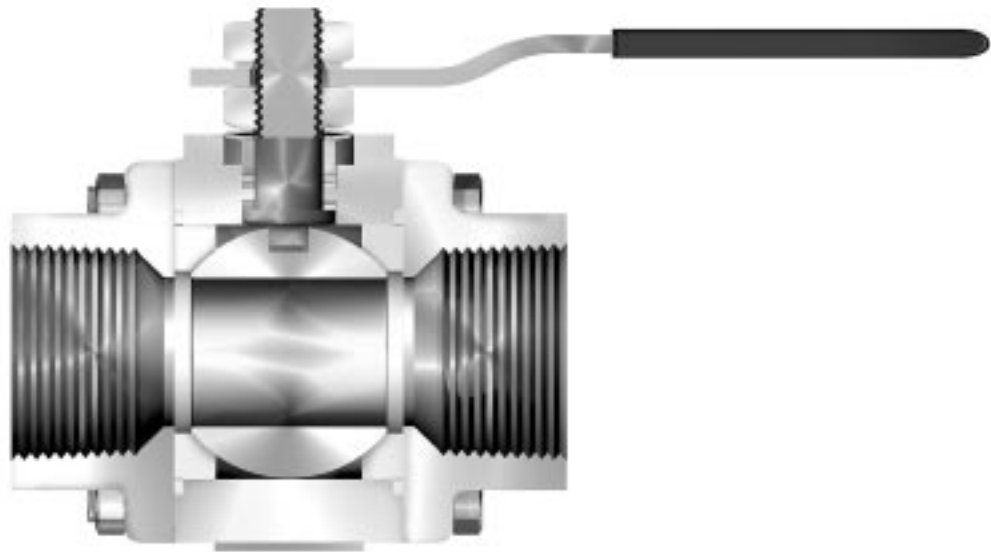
SB Series Swing-Out Ball Valve Cross Sectional View
